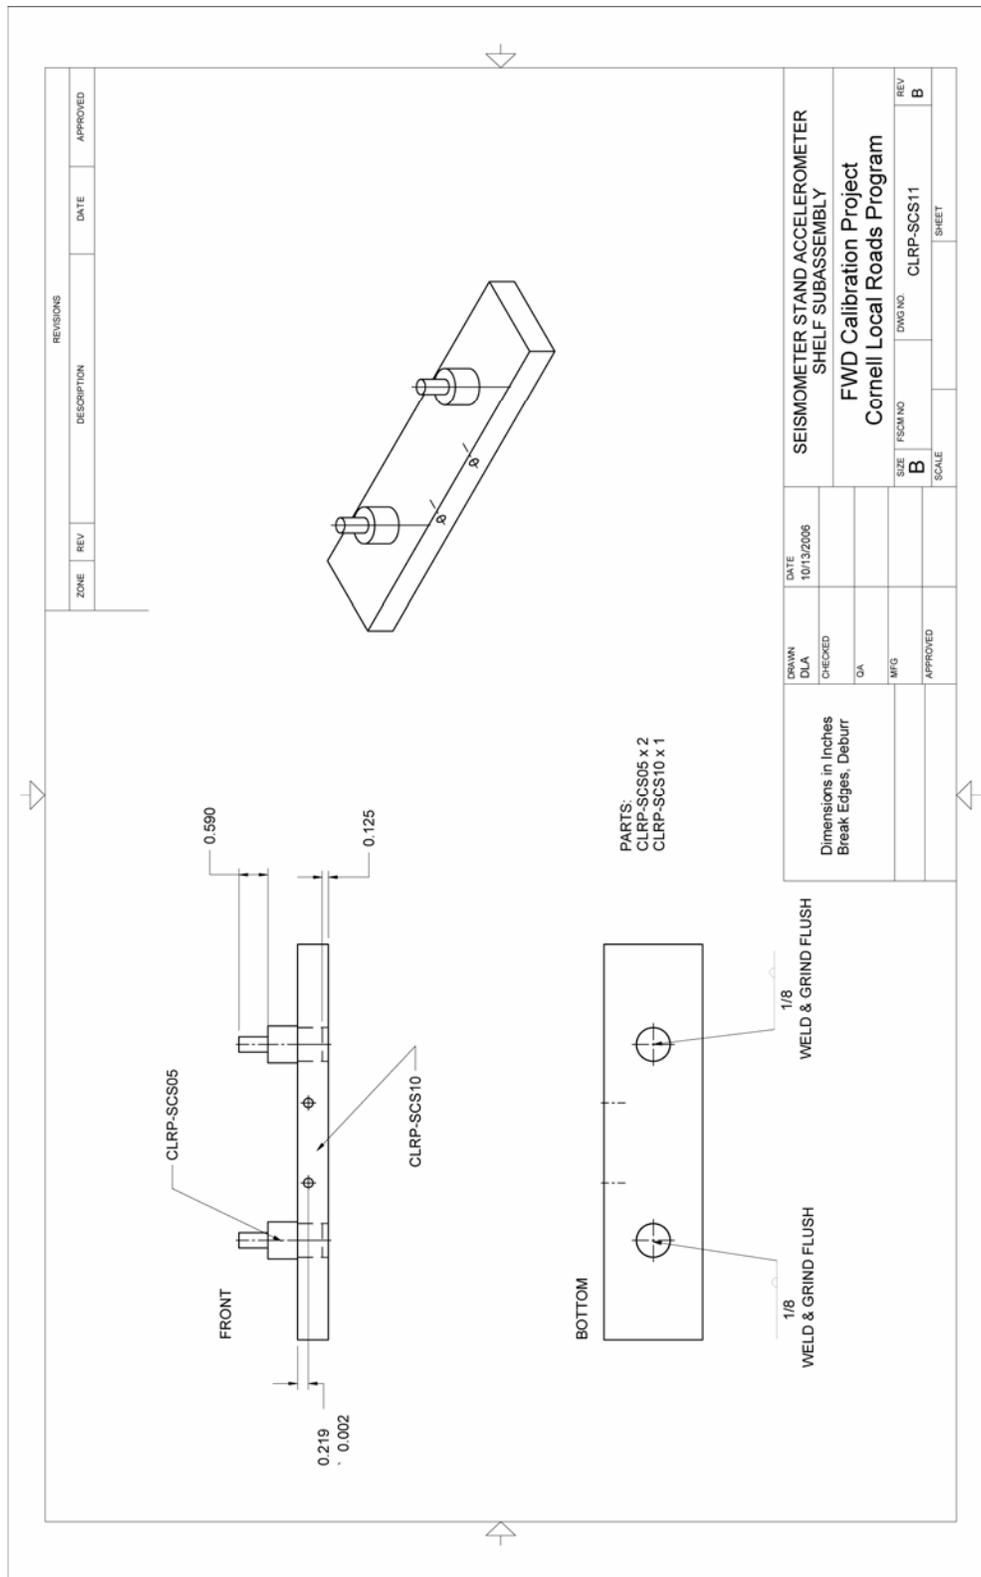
Drawing. CLRP-SCS11 Seismometer Stand Accelerometer Shelf Subassembly.
